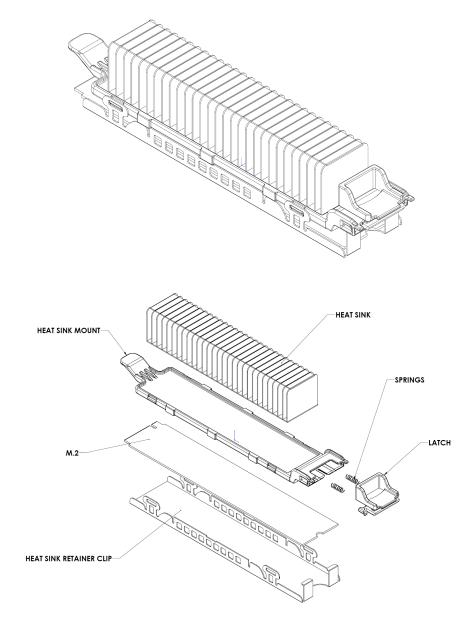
Integrated Heat Sink M.2 Module Assembly
